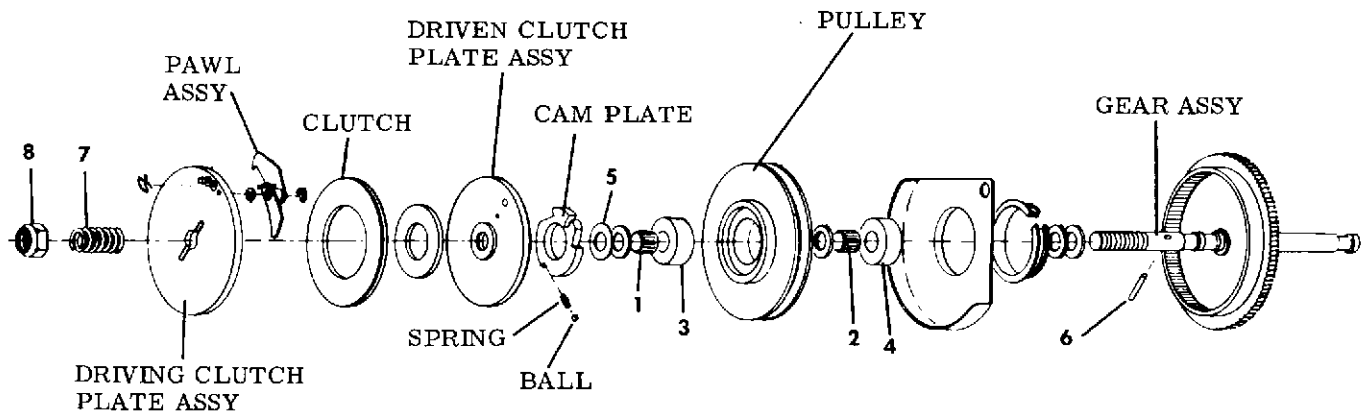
FILM FEED CLUTCH ASSEMBLY
